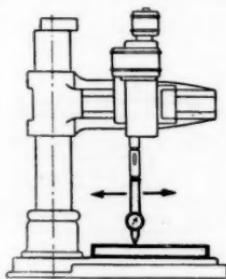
Parallelism of saddle movement to base plate using straight-edge and dial gauge. (Instead of Fig. 72).
